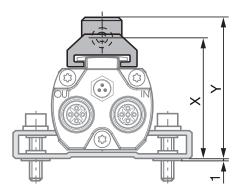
Dimensions and spacing with magnet BTL5-M/N-2814-1S
